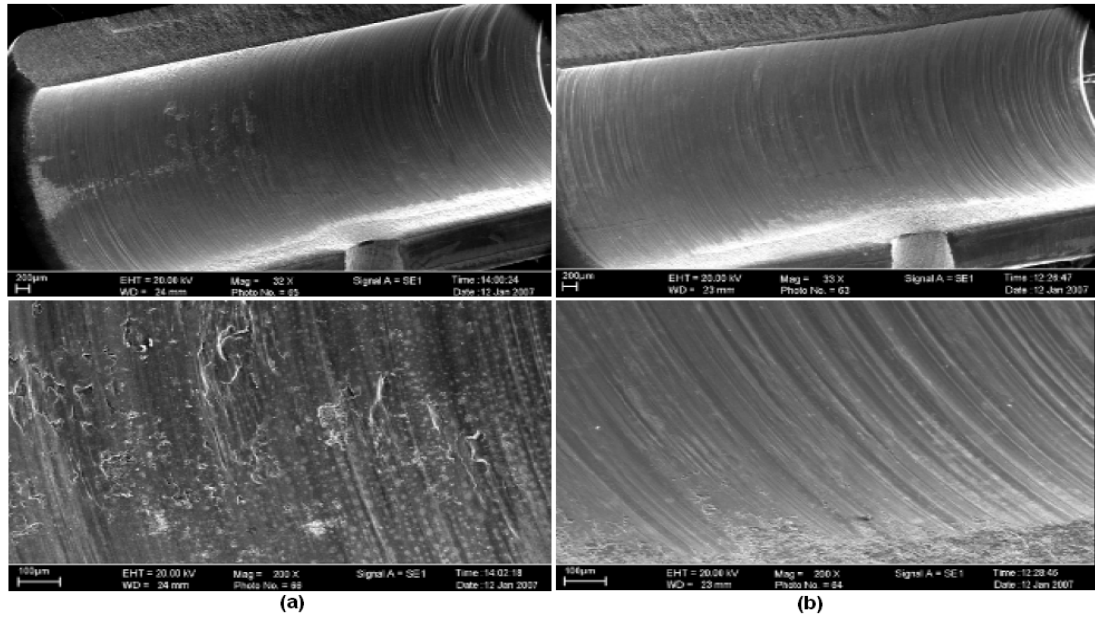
Bushes tested with mineral oil under a) 2250N b) 1600N tension
